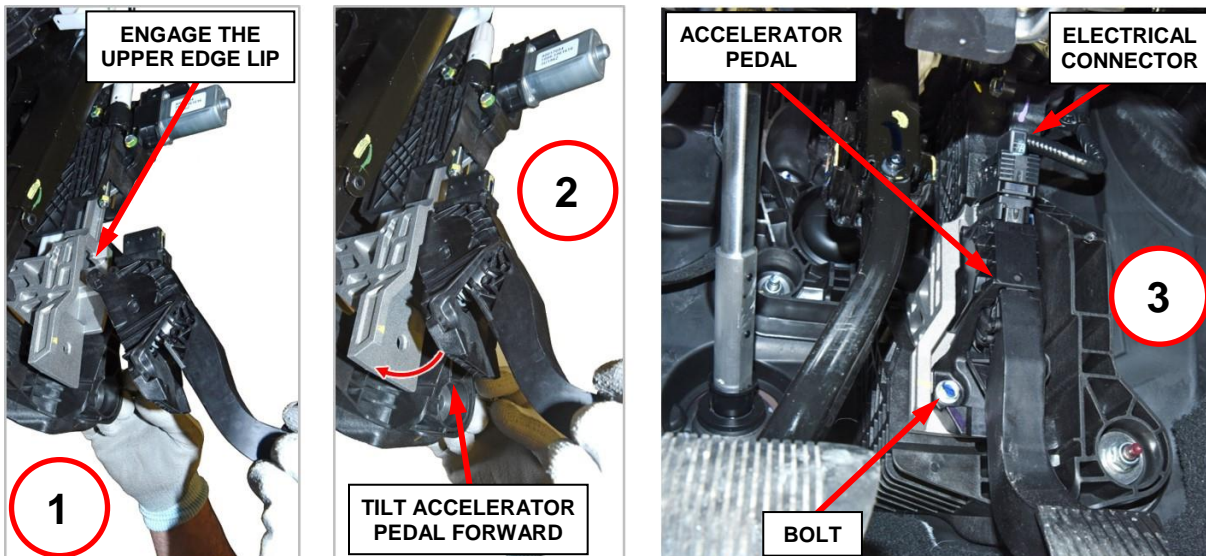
Install Accelerator Pedal to Adjustable Pedal Assembly
